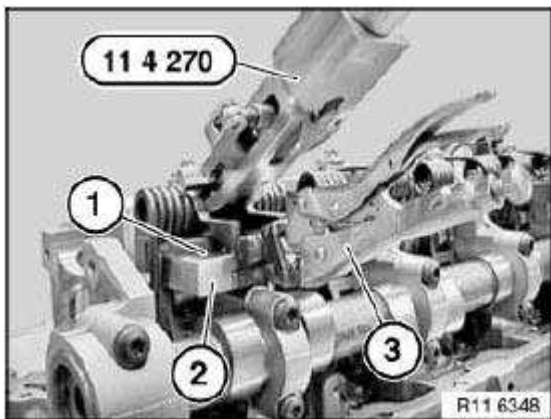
Special Tool (11 4 270) - Gripping Pliers And Guide Block
